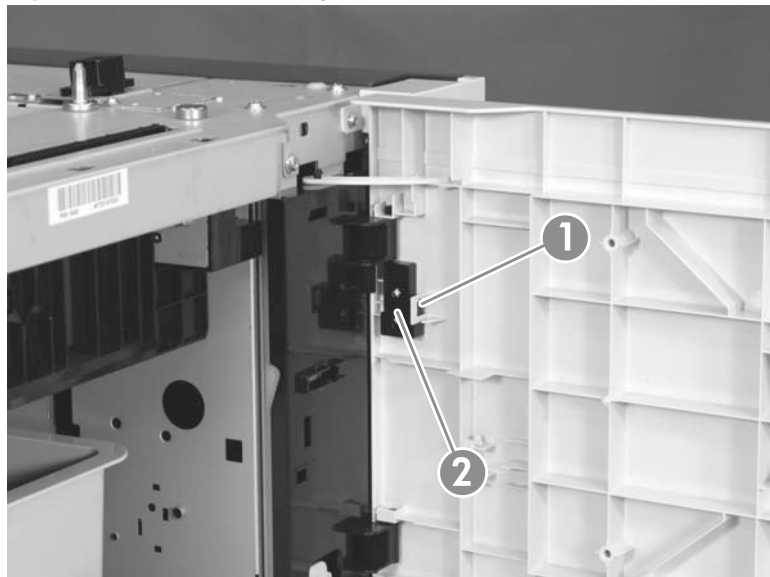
Remove the right front cover (2,500-sheet paper feeder HCI)
